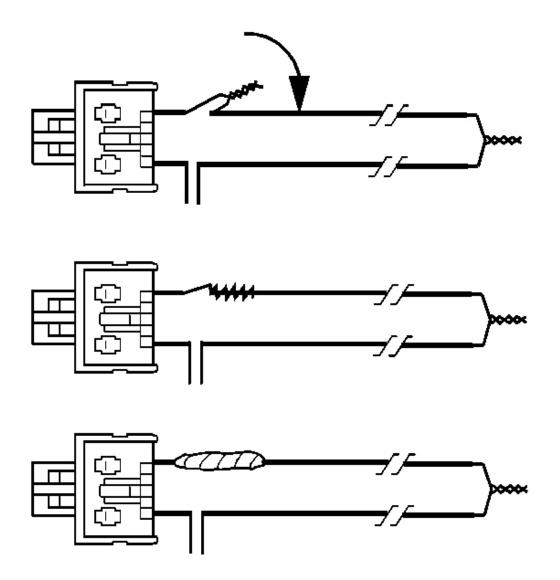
Bending Twisted Connection Flat & Insulating With Tape Courtesy of GENERAL MOTORS CORP.
